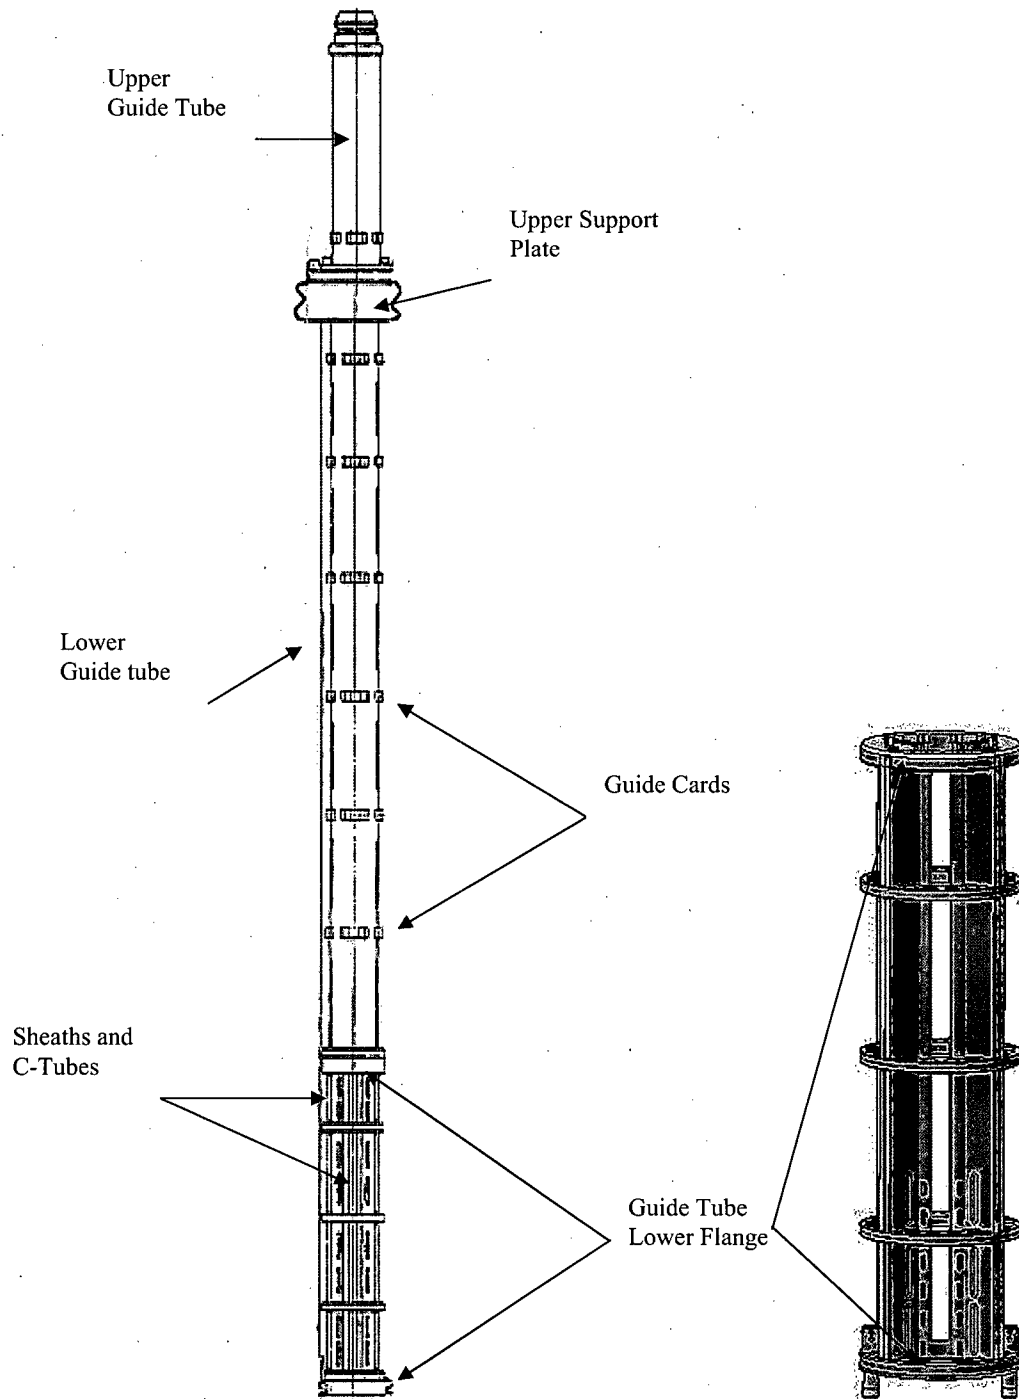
Lower Section of Control Rod Guide Tube Assembly
